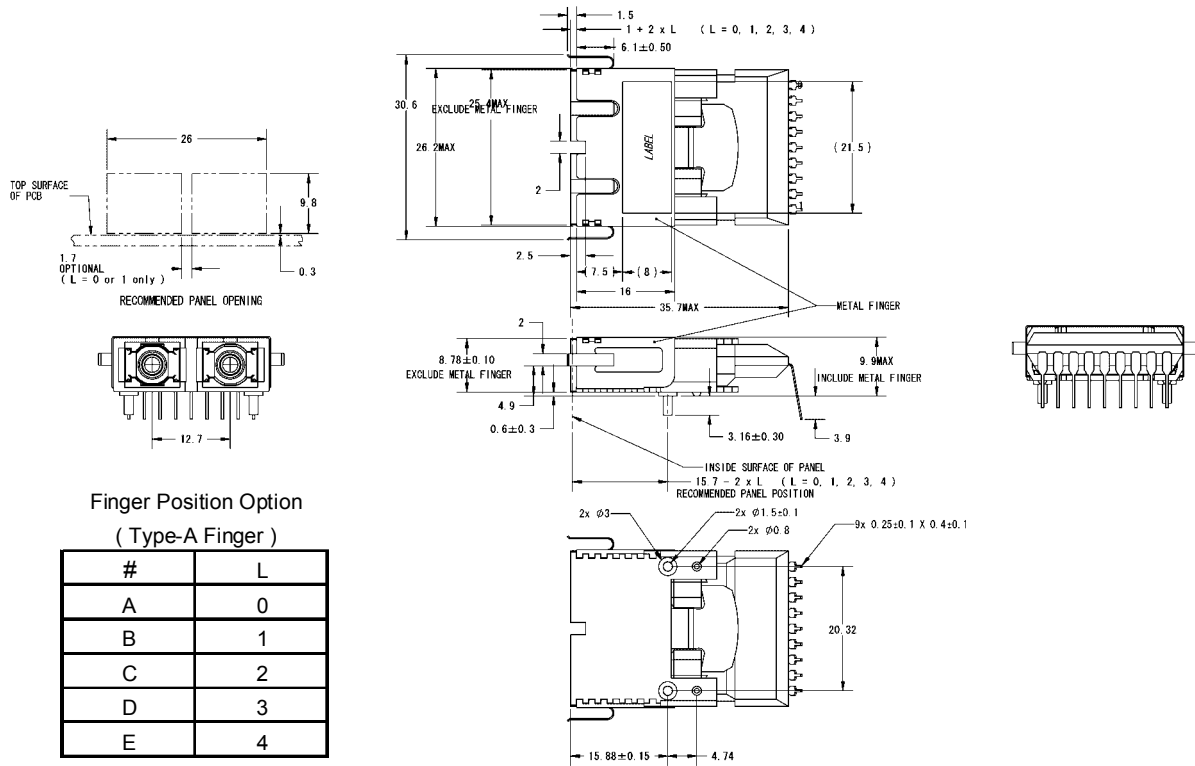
Outline Dimensions (SDM7111-GC-#N)
